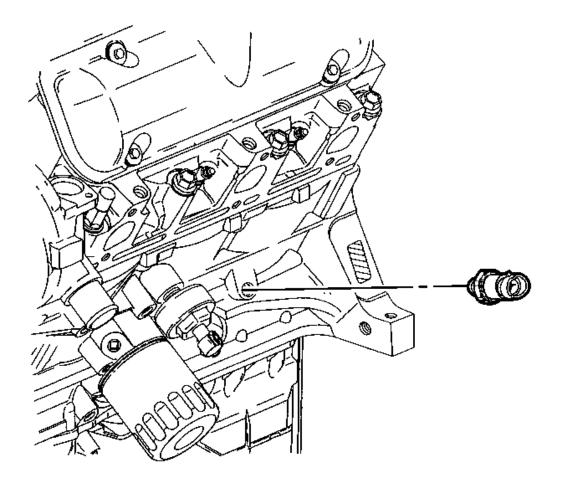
Removing Engine Oil Sensor Courtesy of GENERAL MOTORS CORP.
